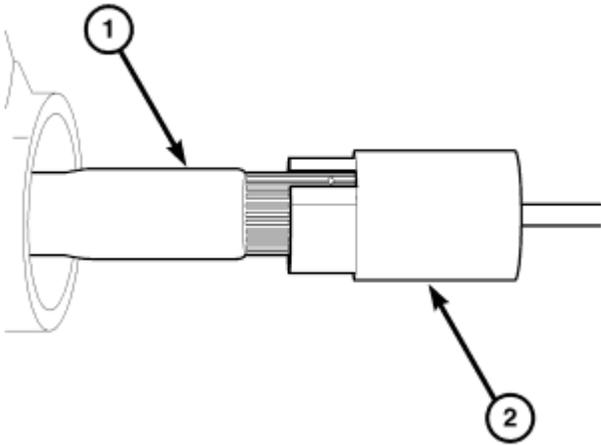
Installing Shaft Seal With Installer 8806 And Handle C-4171
